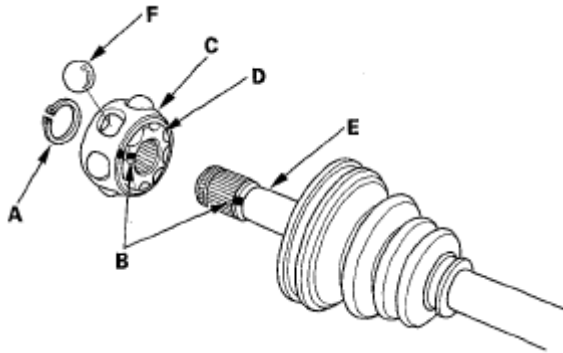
Making Match Mark On Bearing Retainer, Bearing Race And Driveshaft
